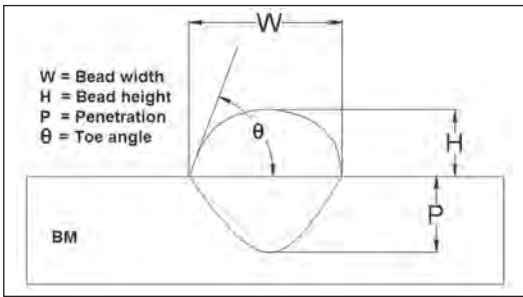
A schematic diagram of weld bead geometry.
